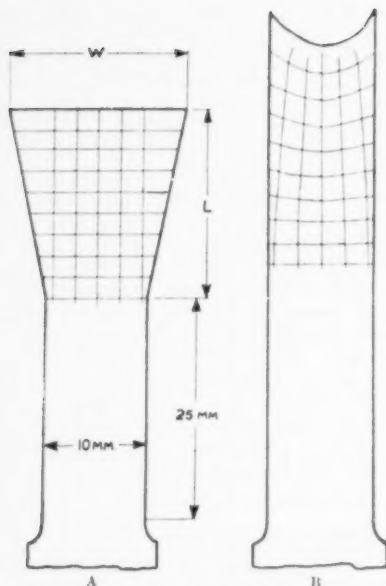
Specimen used in Sachs' wedge-drawing test: (a) before testing; and (b) after testing
